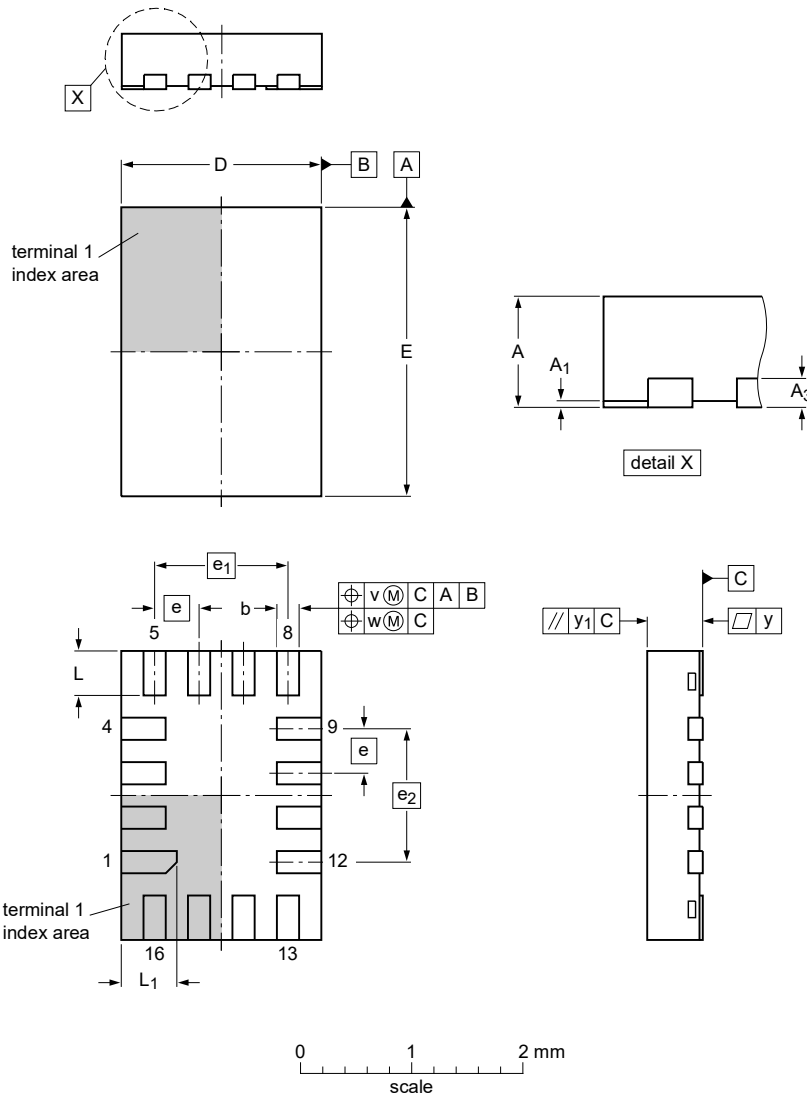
Package outline SOT1039-1 (HXQFN16U)
